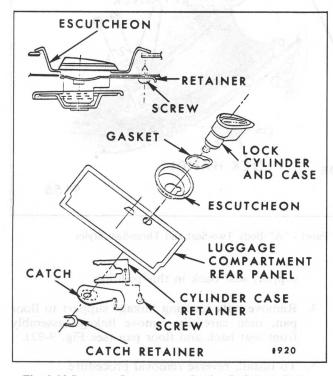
Luggage Compartment Lock - "A" Body Styles
